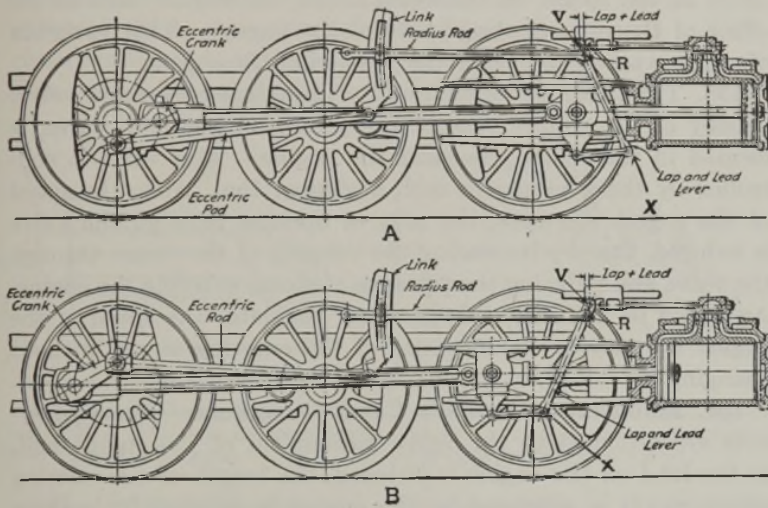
Walschaert valve gear as applied to a locomotive.
